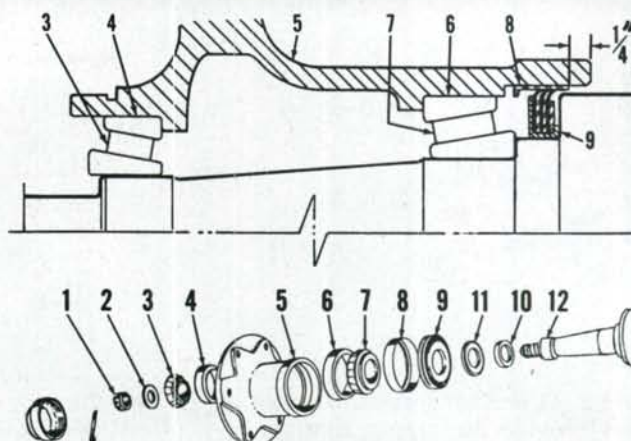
Views of front wheel hub assembly used on dual front wheel tricycle models. Wide front axle models are similar except spacer (10) and shield (11) are not used.
